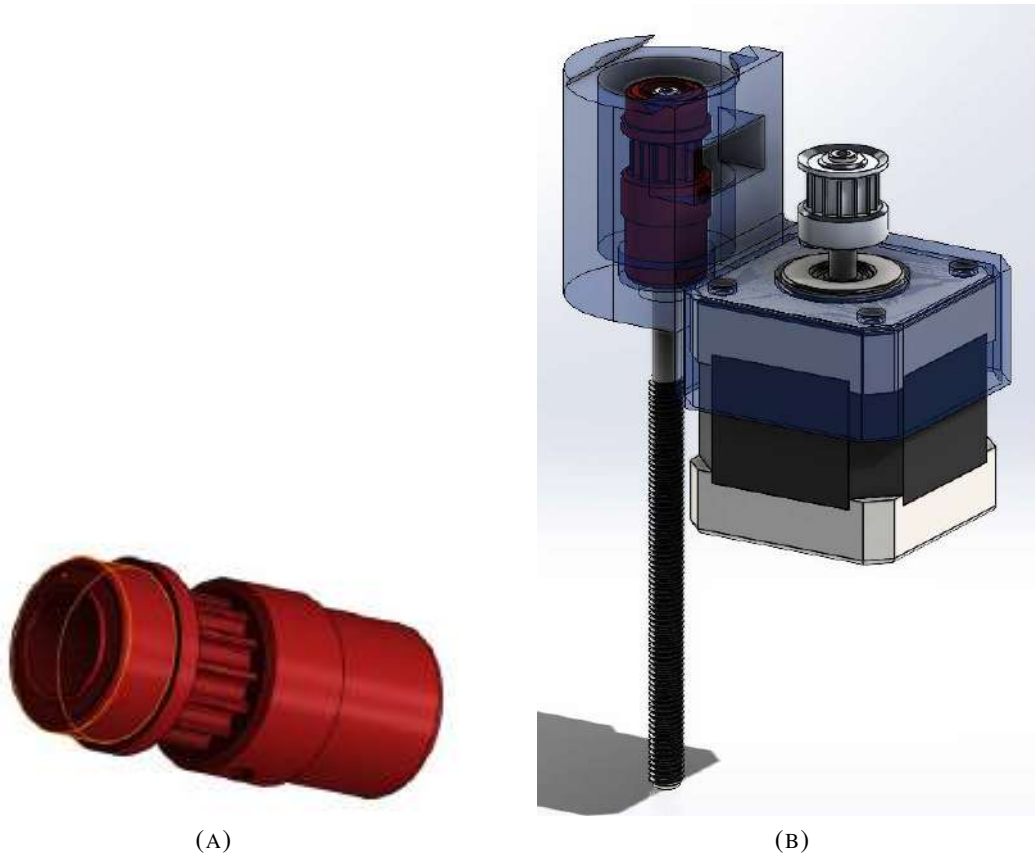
Lead Screw Pulley with Motor Case.
